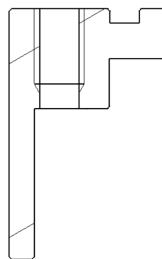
Cross section showing the Spirashield groove and screw hole including thread.
